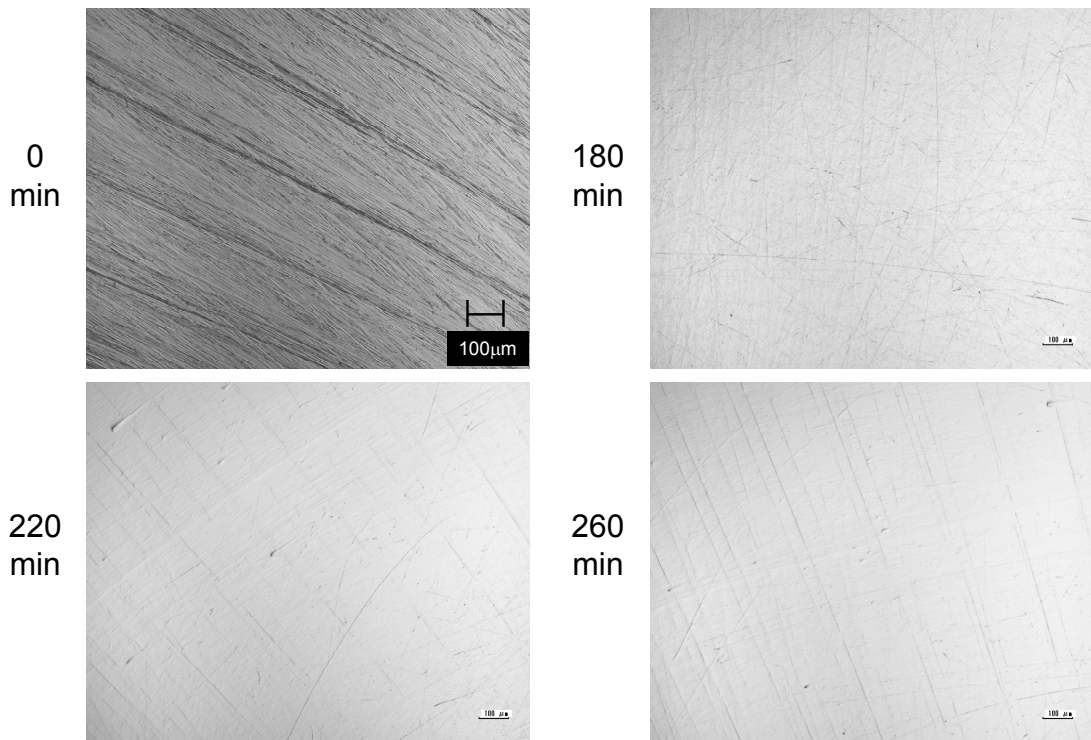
Surface of workpiece at the peripheral part ( # 600 )
